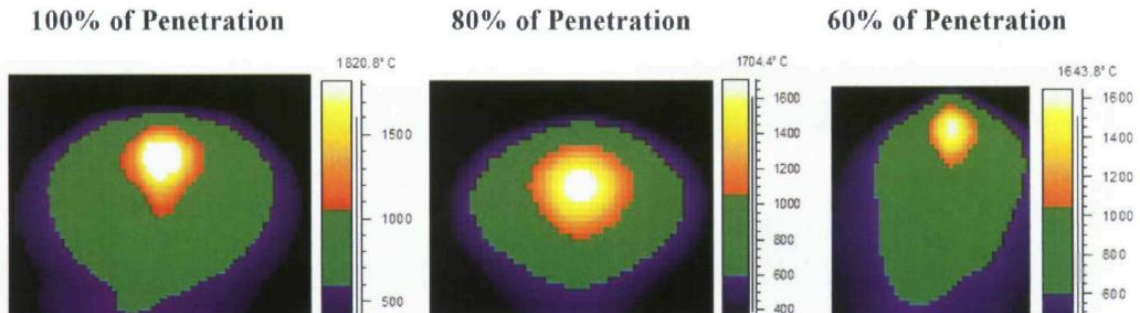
Examples of thermography inspection in butt welding [5]
